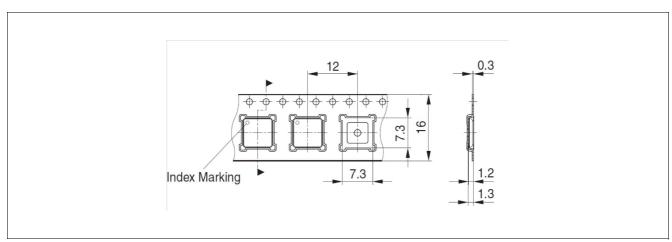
Tape Reel Packing Dimension Drawing of VQFN48
